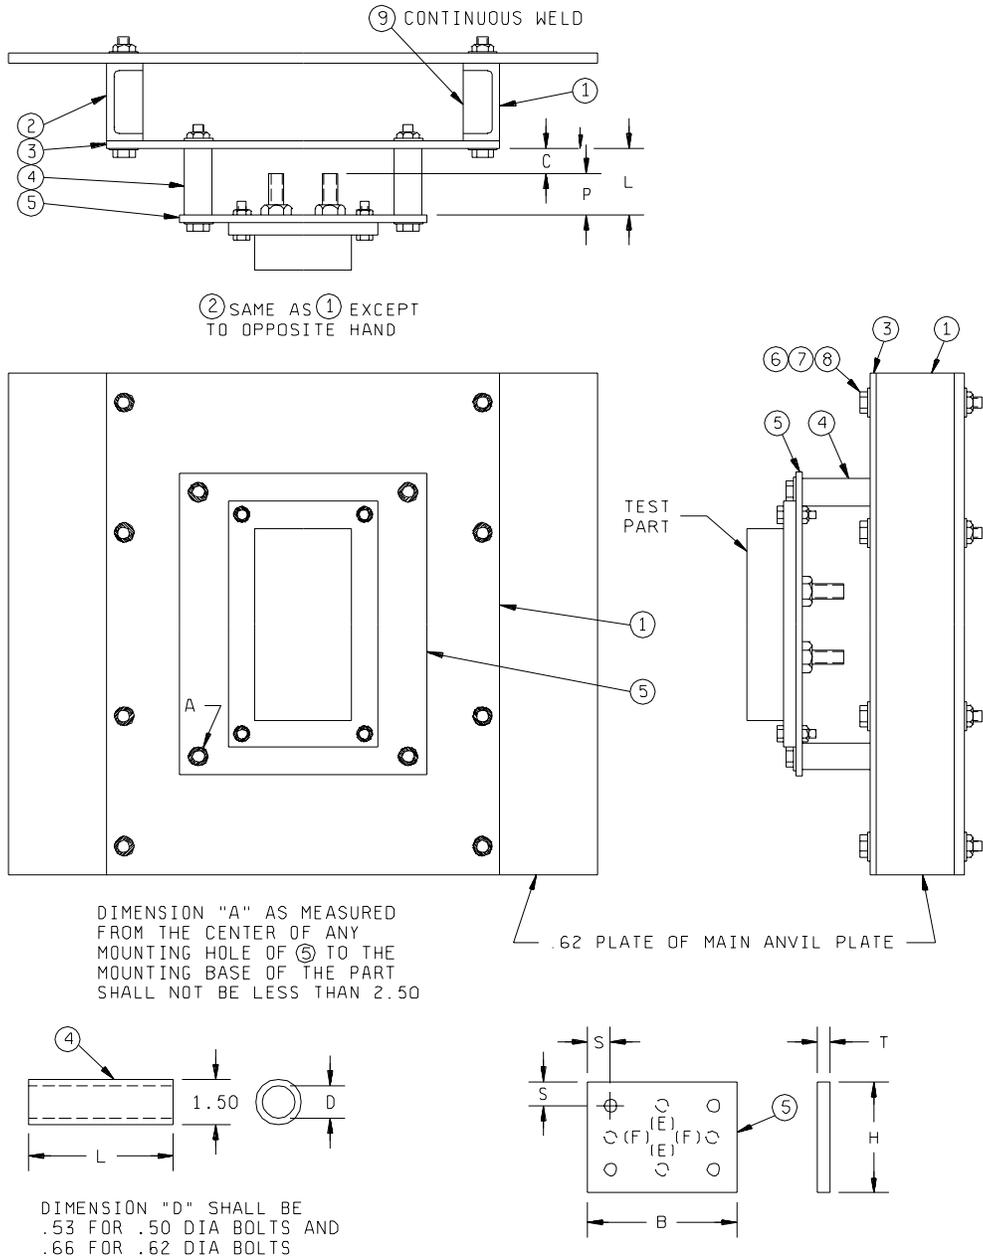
Standard mounting fixtures for deck, or platform, mounted parts.
